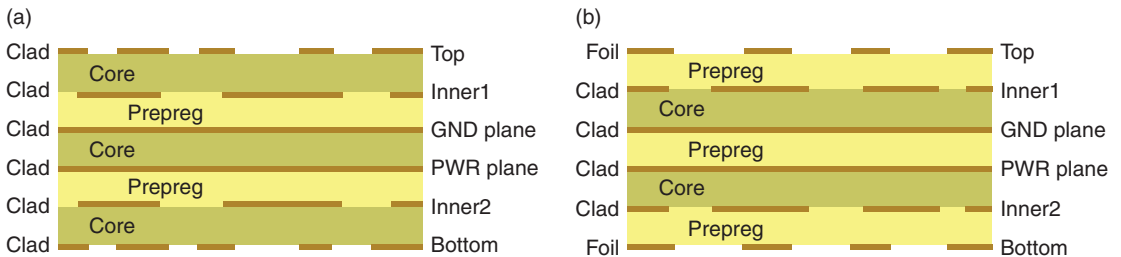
Two stack-up methods for a six-layer board. (a) Multicore, outer clad. (b) Multicore, outer foil.
